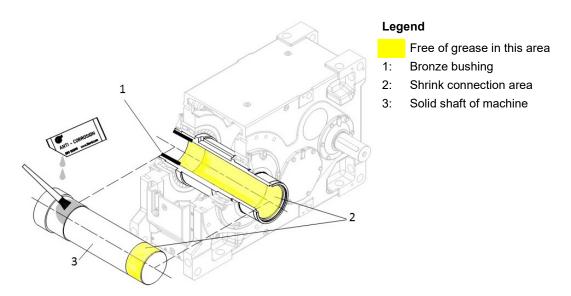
Machine shaft assembly for special hollow shafts with shrink discs
